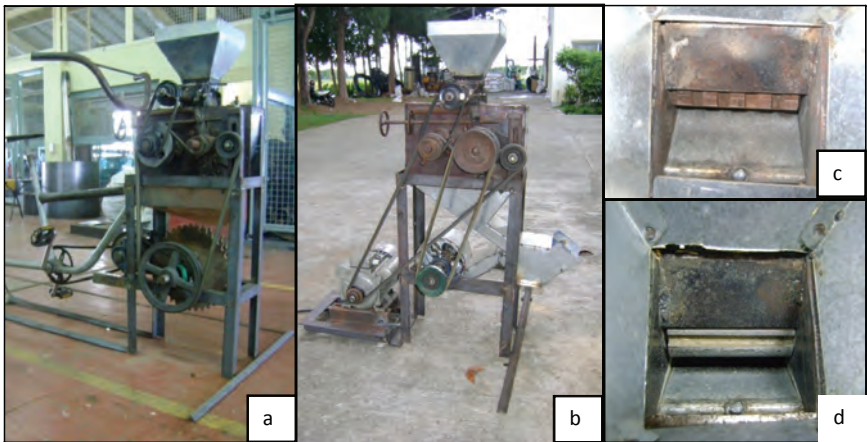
Modified pedal operated BRM prototype showing the (a) feeder roll attach to slower rubber roll, (b) FR attach to faster RR and blower attach to slower RR, (c) original or first design of FR, and (d) modified FR.
